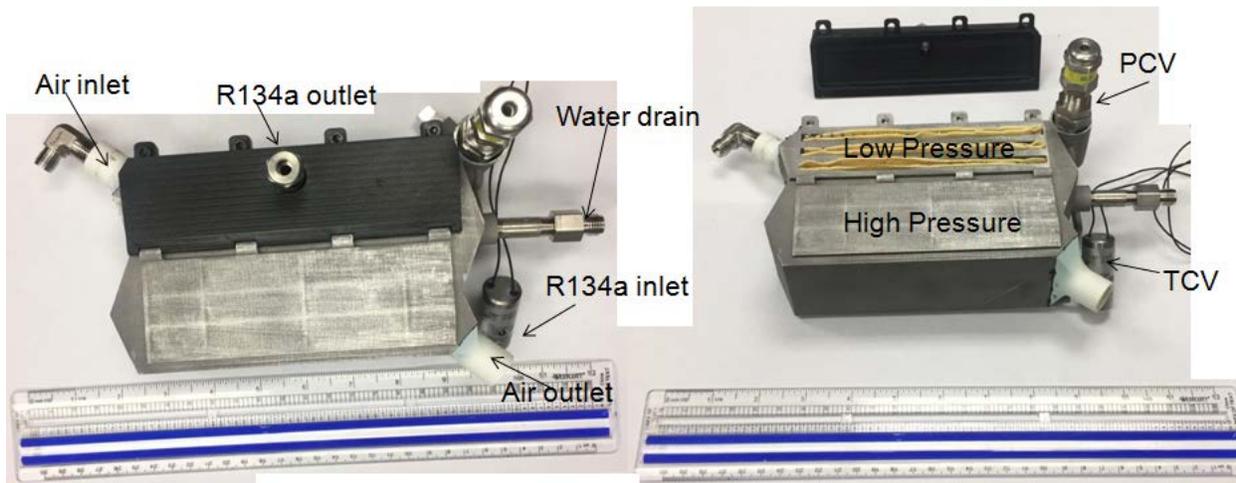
Printed heat exchanger combining 30 psig and low pressure components. (Left) heat exchanger fully assembled, (Right) heat exchanger partially disassembled to show low pressure wetted region.
